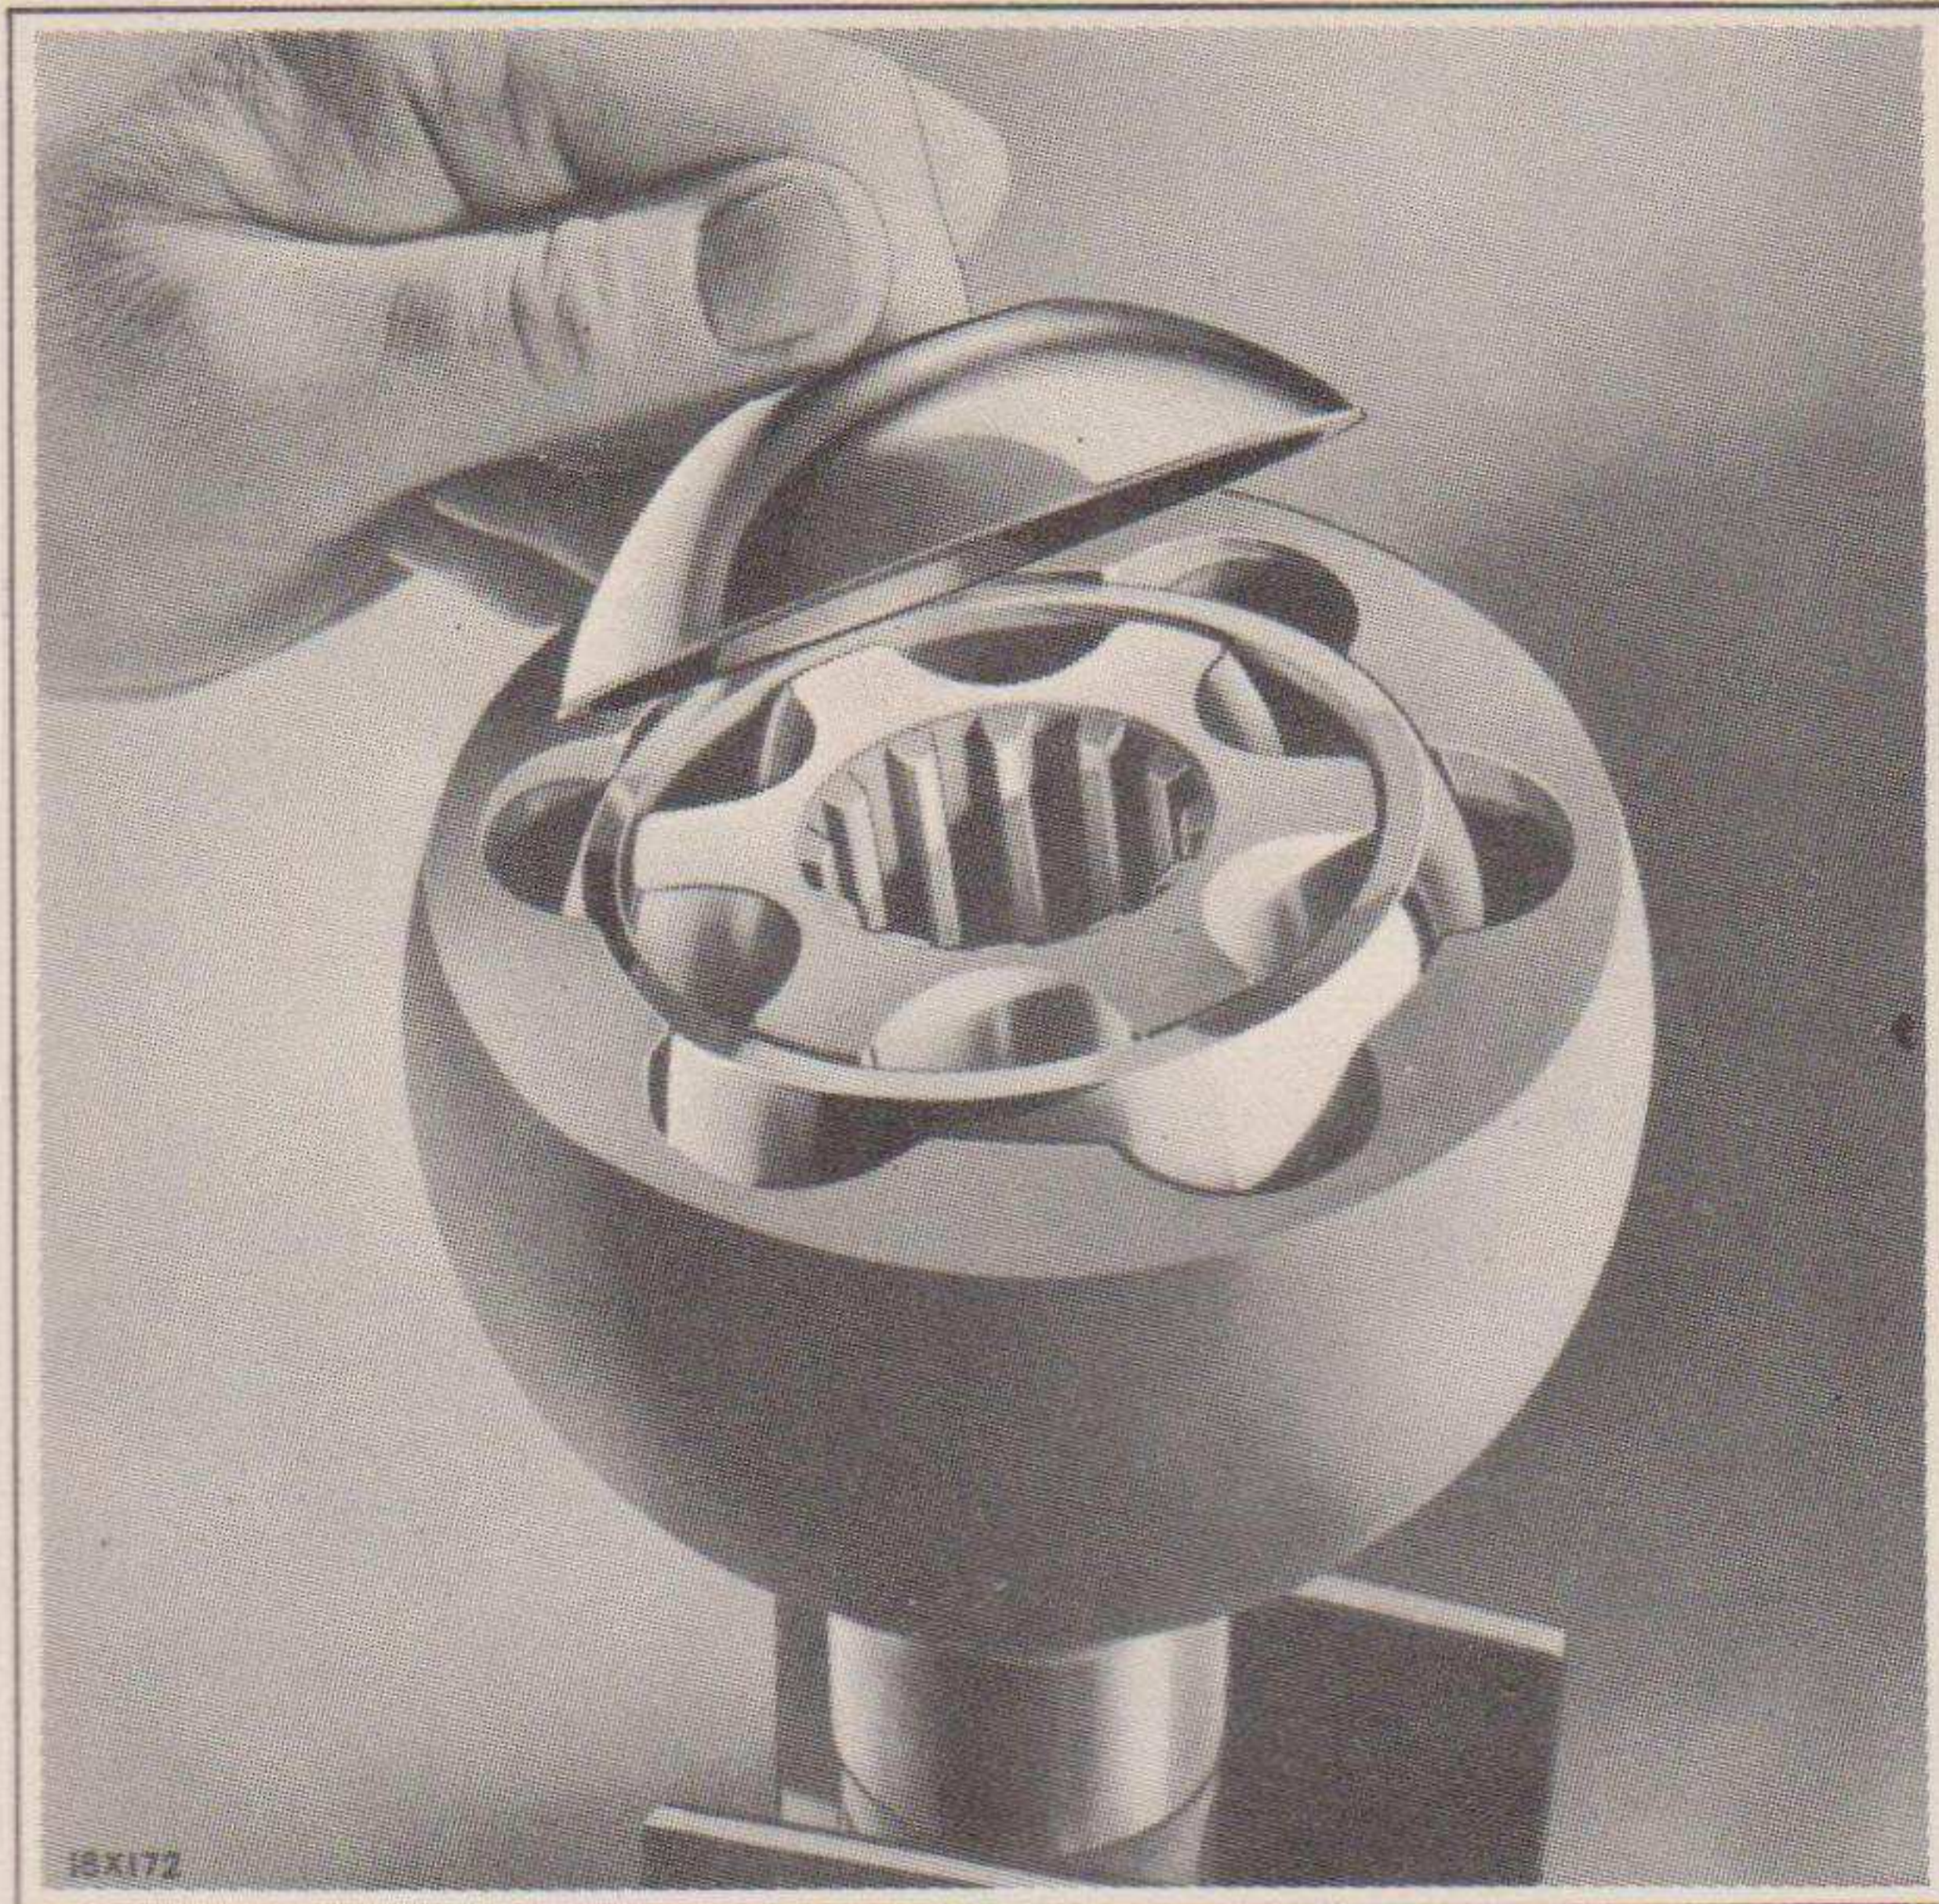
Removing Universal Drive Pilot (Rzeppa)
